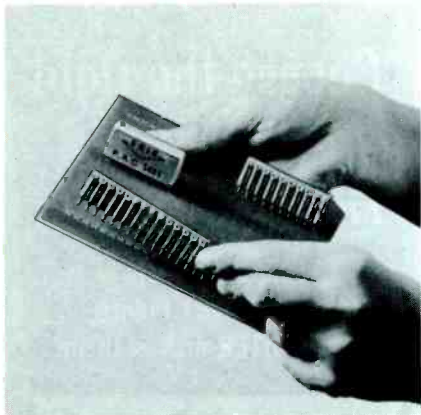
A PAC Unit Being Inserted Into a Printed-Wiring Board. (Photograph Courtesy of Erie Resistor Corporation.)
